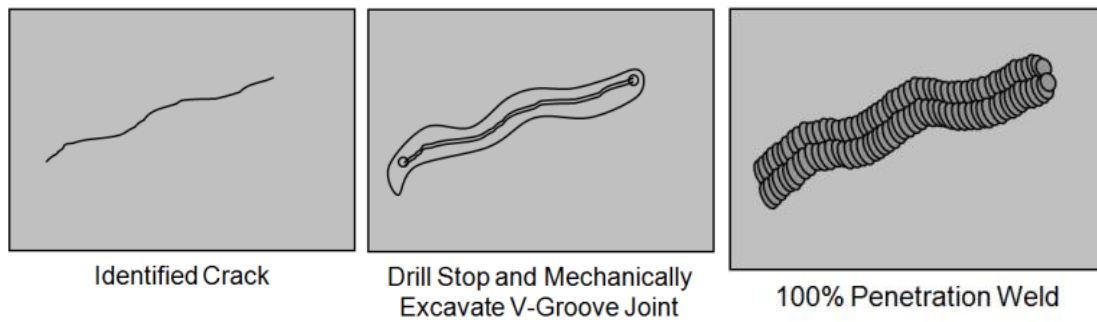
Permanent Crack Repair via Excavation [2]
